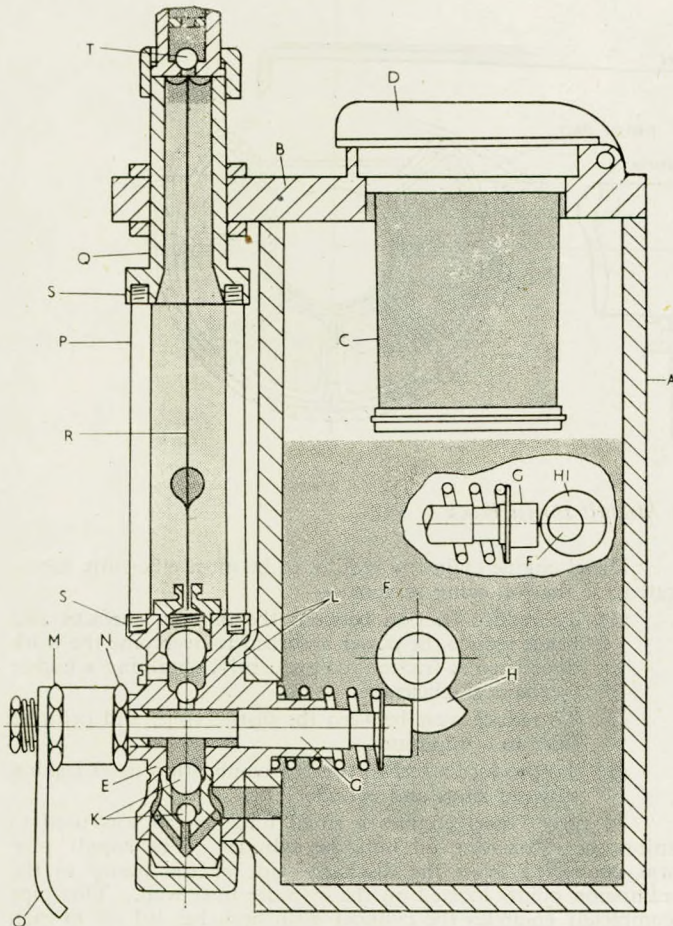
Section of level driven (“T and K”) mechanical sight feed cylinder lubricator (J. and W. Kirkham type)
